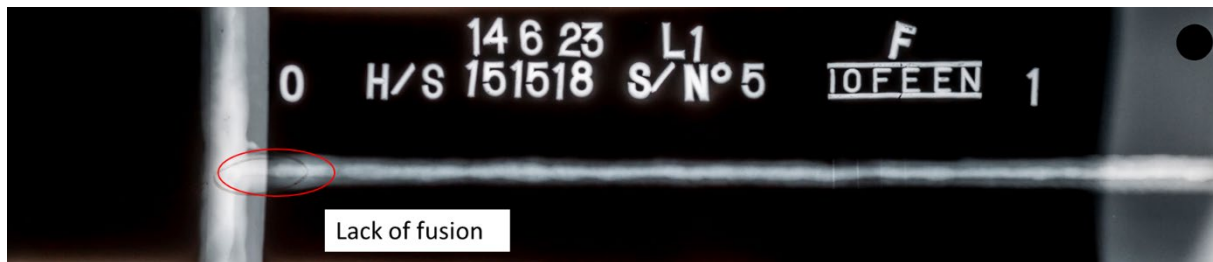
Radiograph of longitudinal weld in a pressure vessel. Lack of fusion in the weld is highlighted in red.
